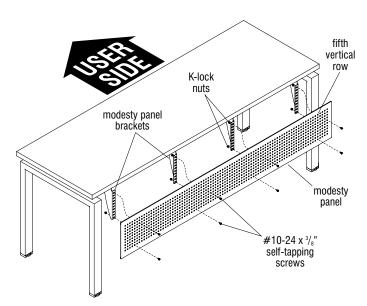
Single-Sided Fixed Benching, Modesty Panel Installation
